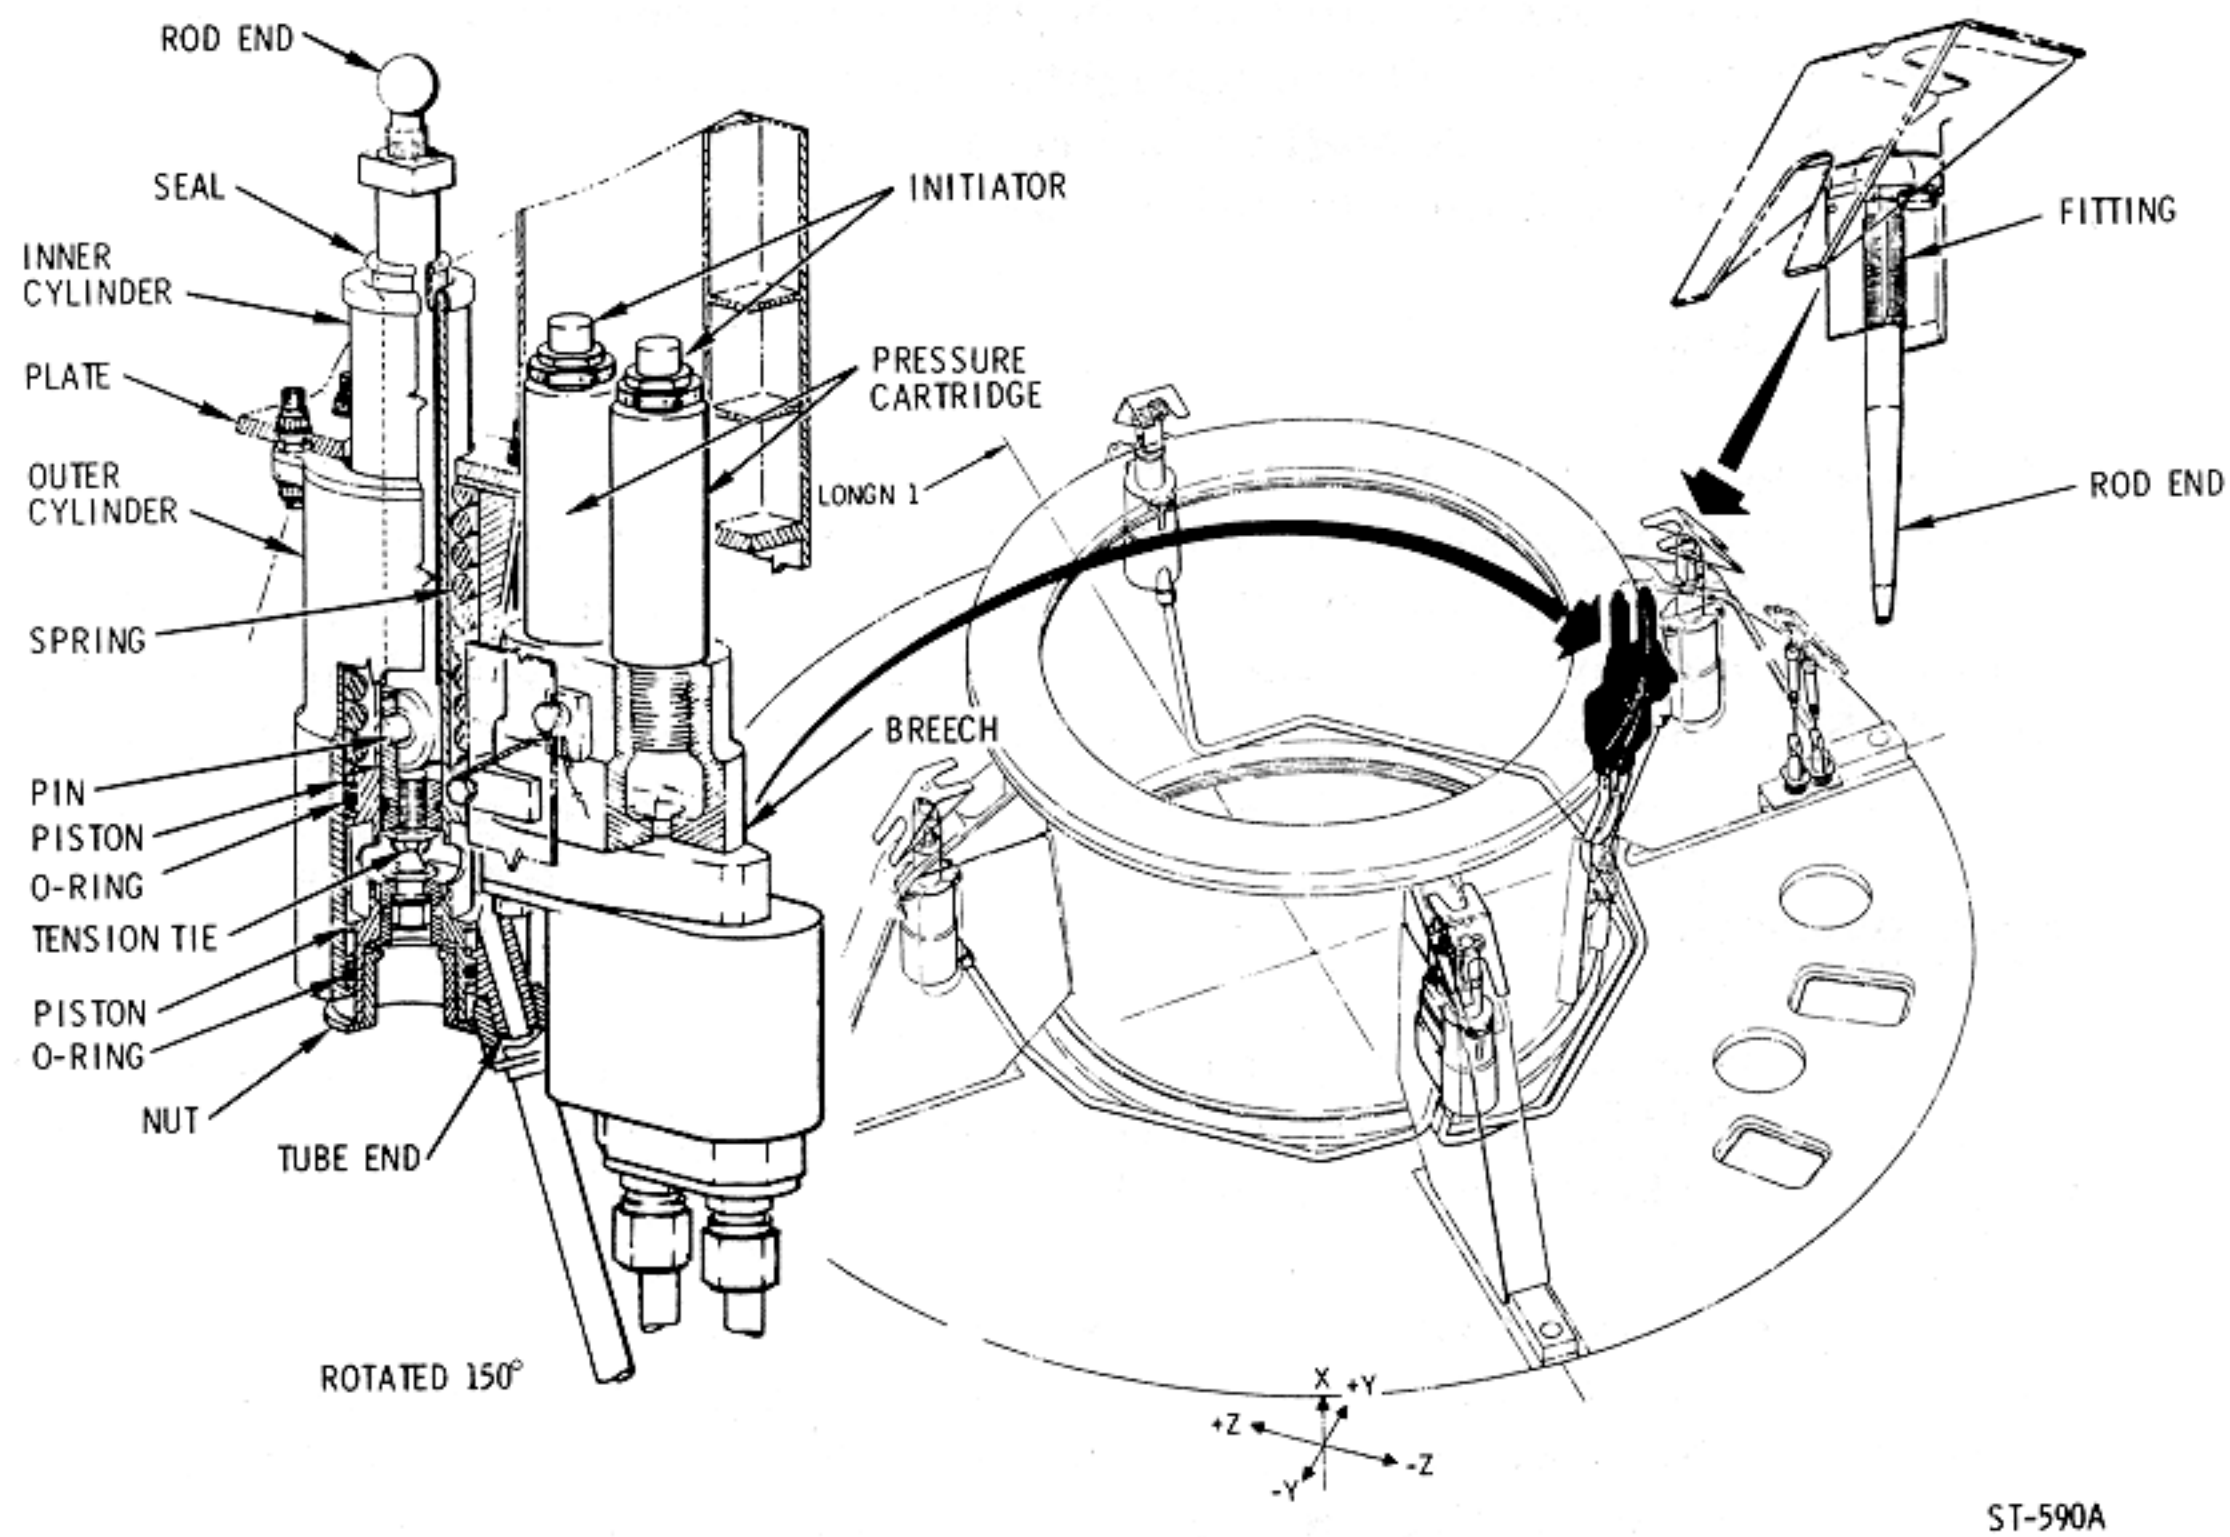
Forward Heat Shield Attachment and Thruster Assembly
